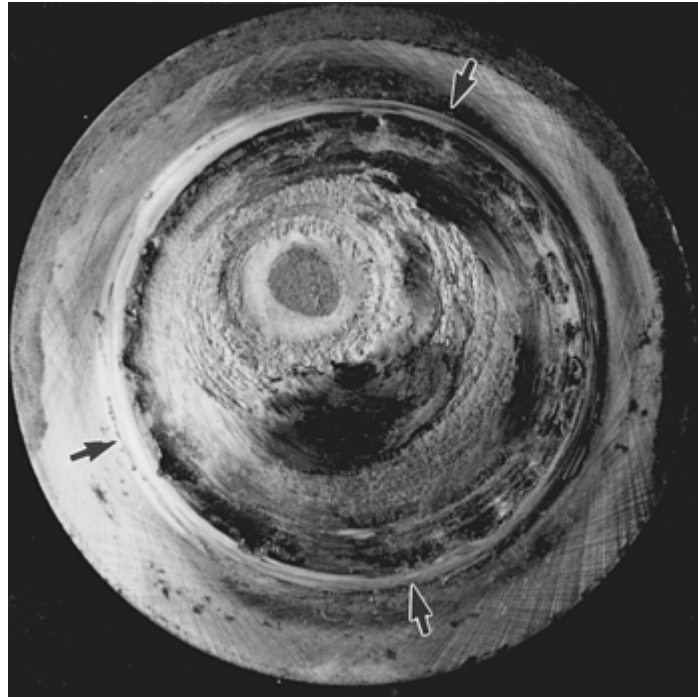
Failed compressor rotor shaft. Fracture occurred at radius between large and small diameters. Arrows indicate some of fatigue origins. 1×
